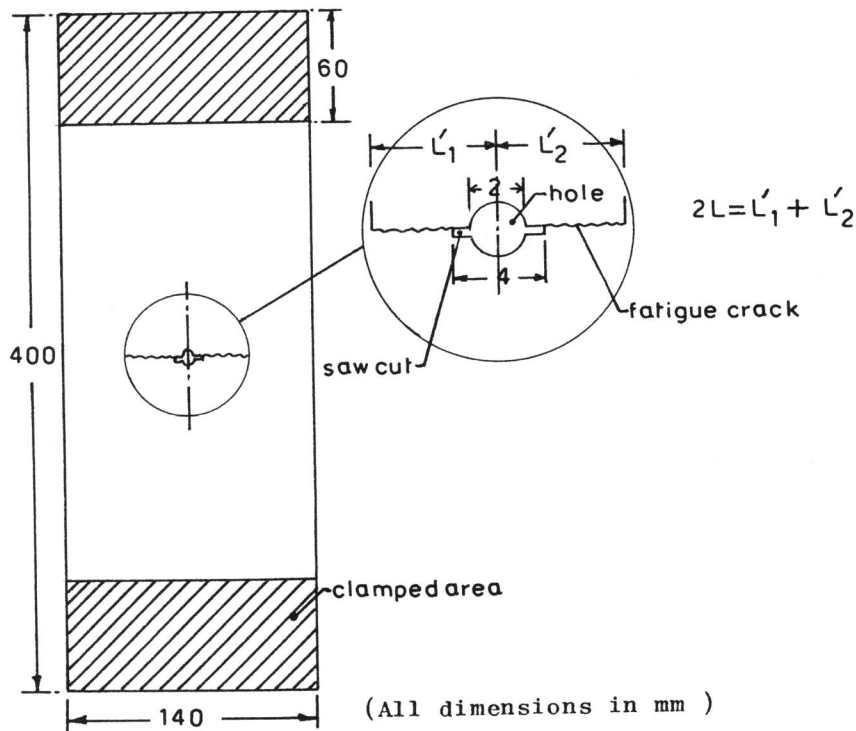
Dimensions of centre-cracked specimen for fatigue test.
